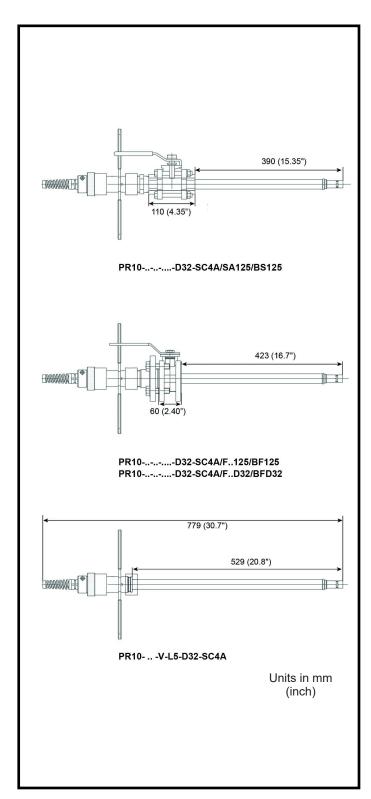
Dimensional drawing PR10...-D32 with mounted SC4A sensor
